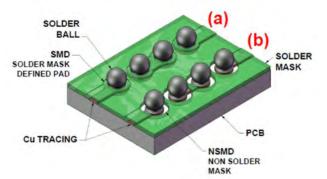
(a) Solder balls are roughly 20% larger than the SMD solder mask defined pad opening per table 4-4 of IPC-7095B. (b) Solder balls on NSMD pads are generally the same size as the BGA ball pad.
